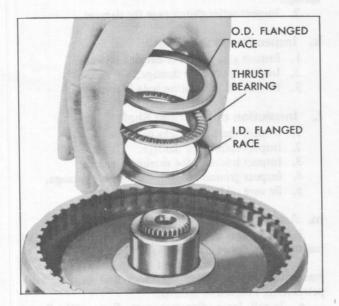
Internal Gear, Thrust Bearing and Races
